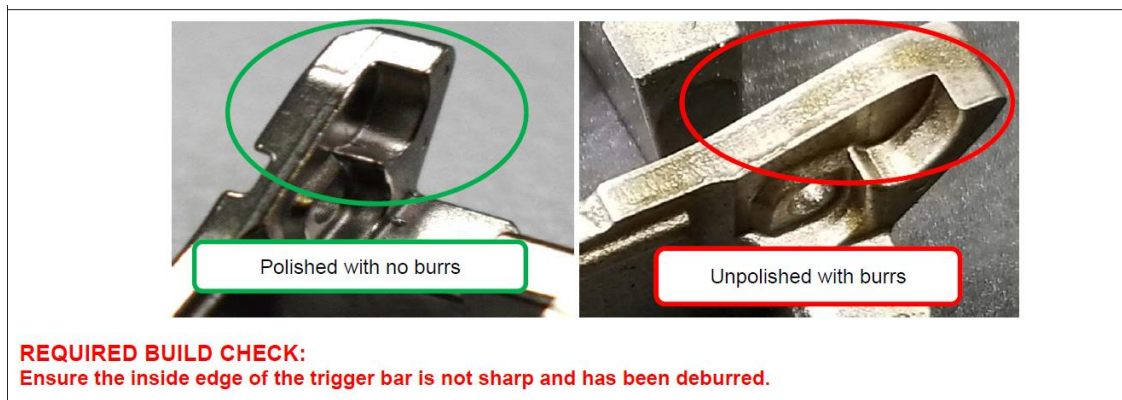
Image from Sig Sauer P320 Assembly and Quality Inspection Master
